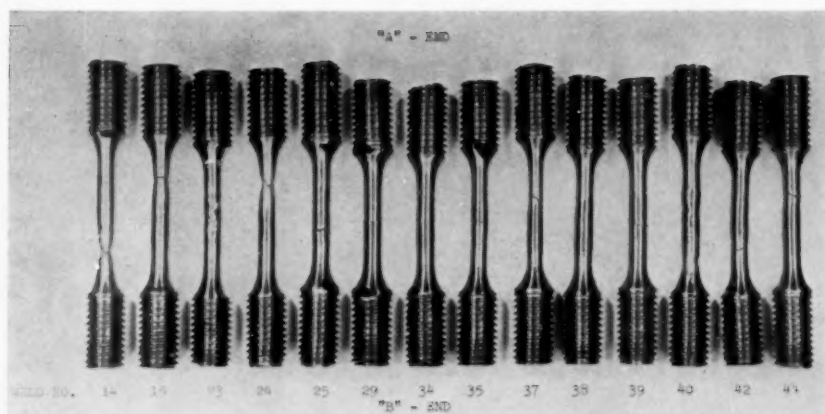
APPEARANCE OF ROOM-TEMPERATURE WELD TENSILE TEST SPECIMENS AFTER RUPTURE
